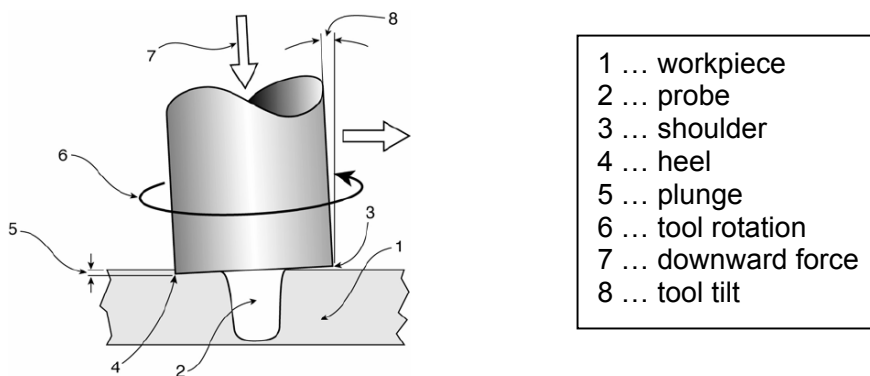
Illustration of tool tilt during friction stir welding [4]
